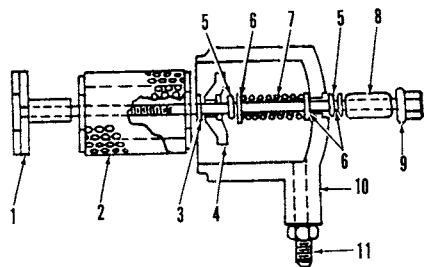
A—Special ported filter cover used in testing transmission pump flow can be fabricated using parts listed.
